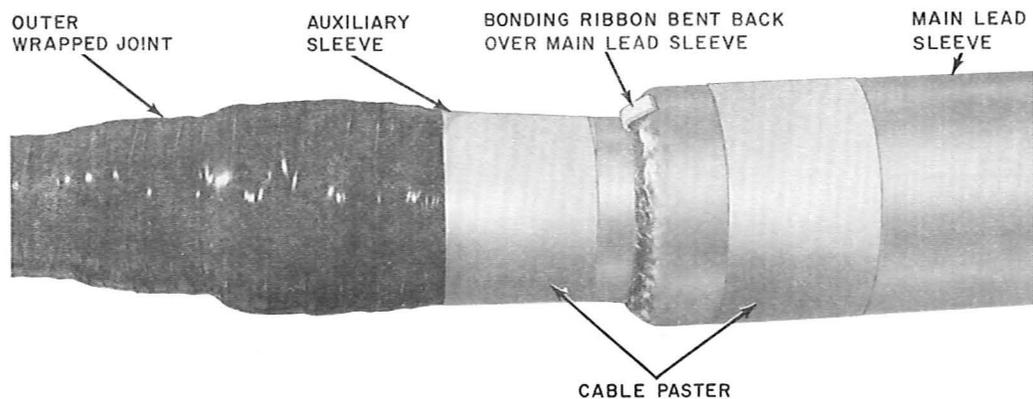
Method of Securing Bonding Ribbon to Lead Sleeve
